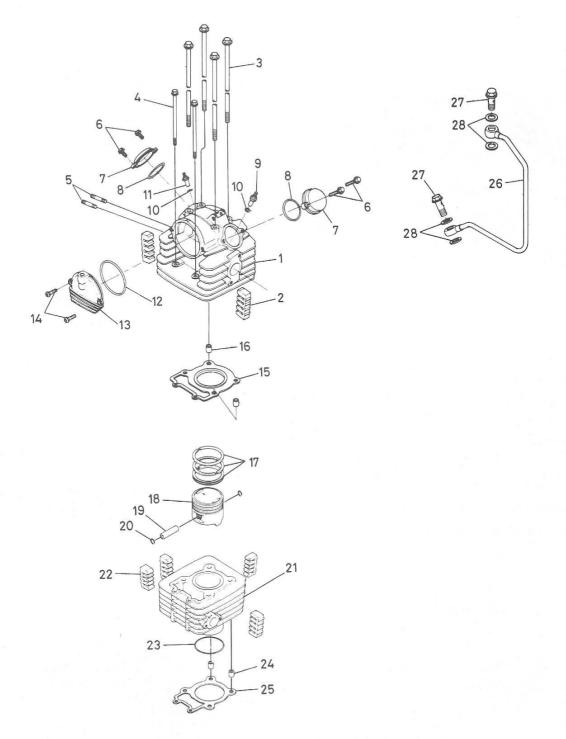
Cylinder head and barrel - KLT160 (KLT110 similar) (Sec 9)
